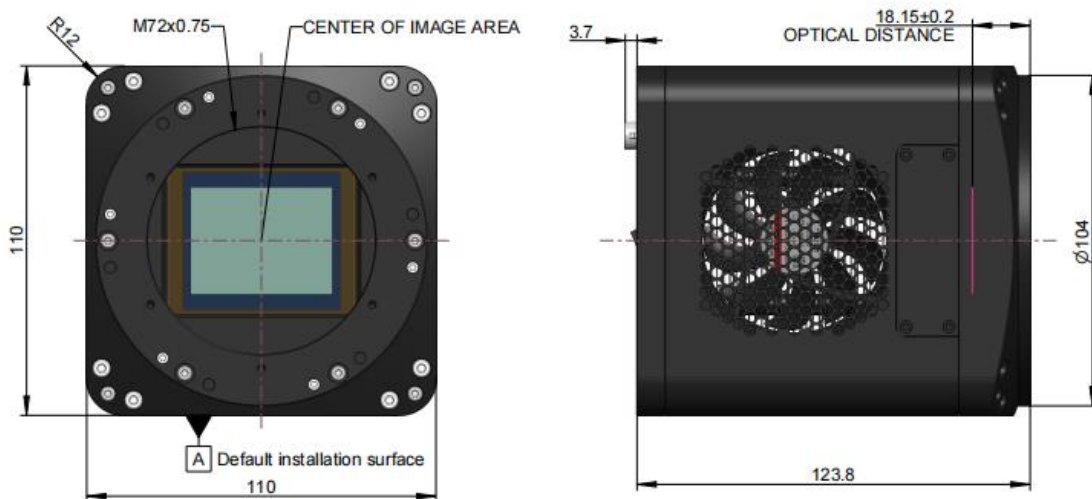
MaxCam-461M-TE dimensions (mm)
